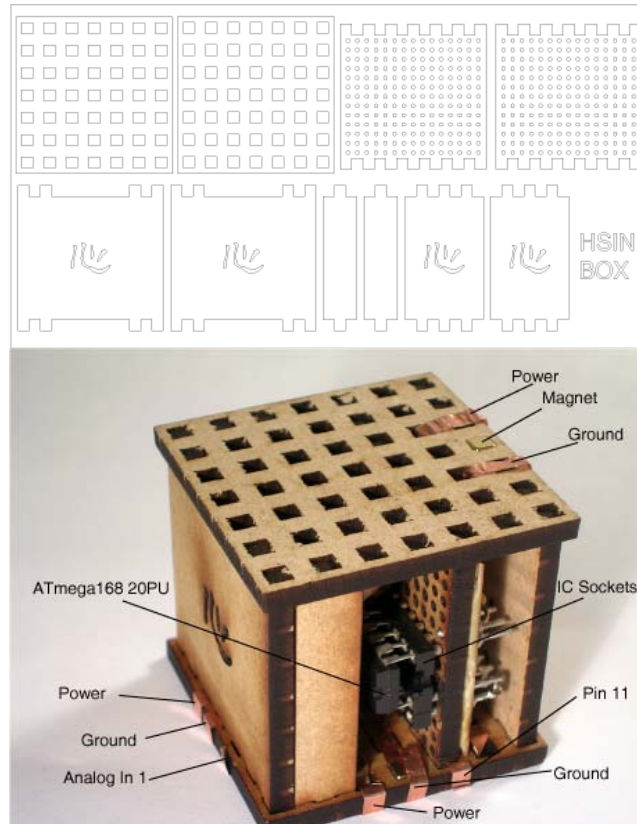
Upper: the HSIN BOX pattern for laser cutting. Lower: microcontroller and electronic components are embedded in the HSIN BOX.
